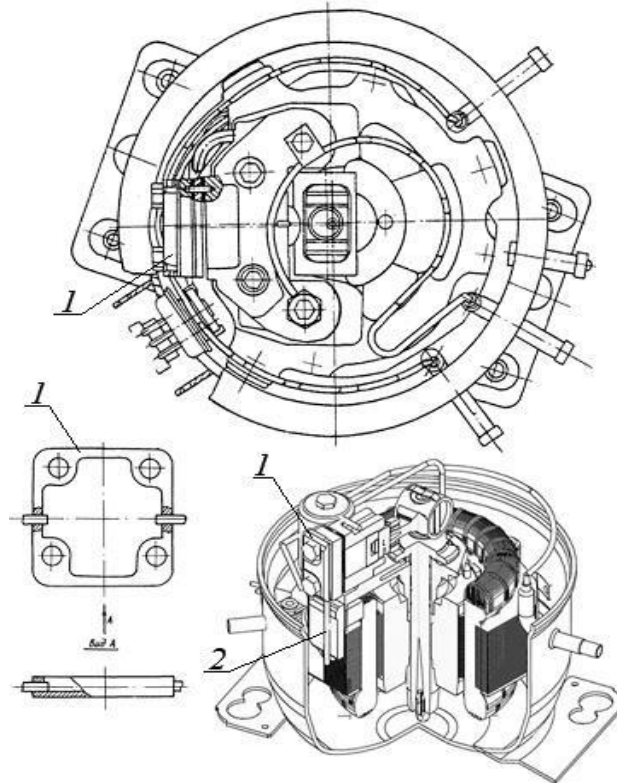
Hermetic piston-type compressor for household refrigeration equipment with cylinder head cooling
